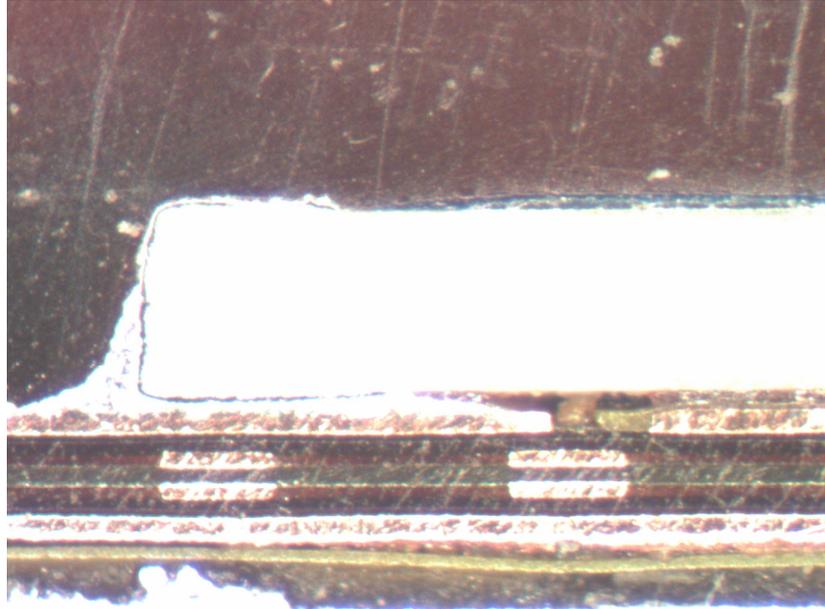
Hot Melt 1 on FLEX Test Board 2512 Resistor Image
